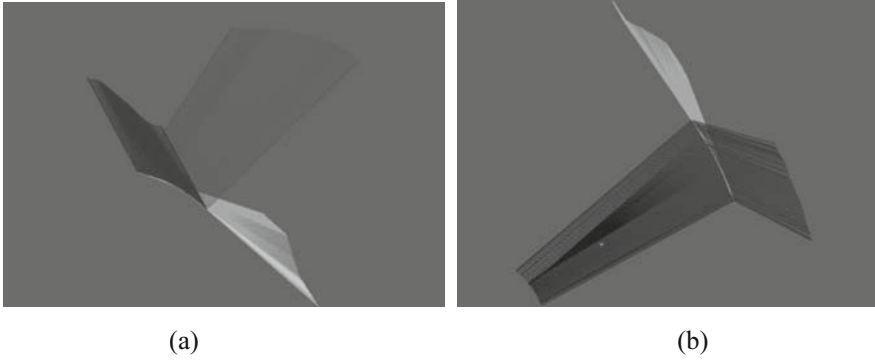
Robot grinding path for (a) convex part and (b) concave part
